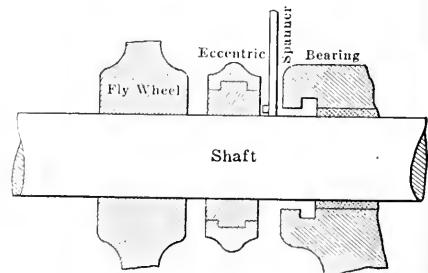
FACE SPANNER TURNING ECCENTRIC ON SHAFT
